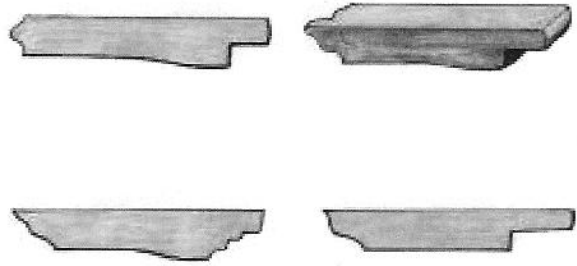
Above, correct. Below, incorrect. Left—initial shoulder backed off anvil too soon. Right—no upset remains for scarf to be laid upon during weld.
